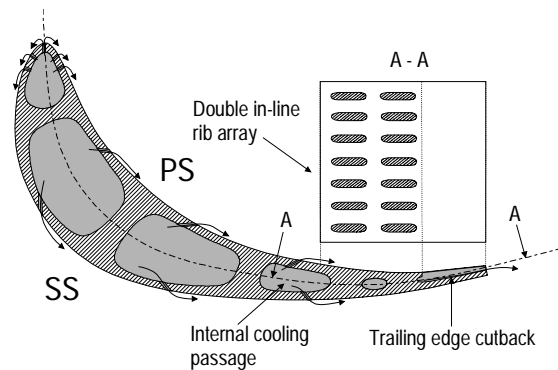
Cross sectional view of a turbine blade with pressure side trailing edge cutback.
